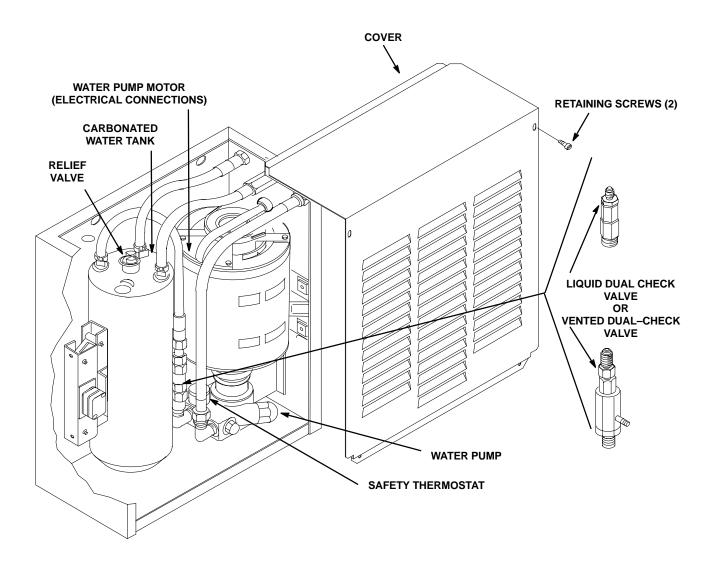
CARBONATOR ASSEMBLY COMPONENTS
